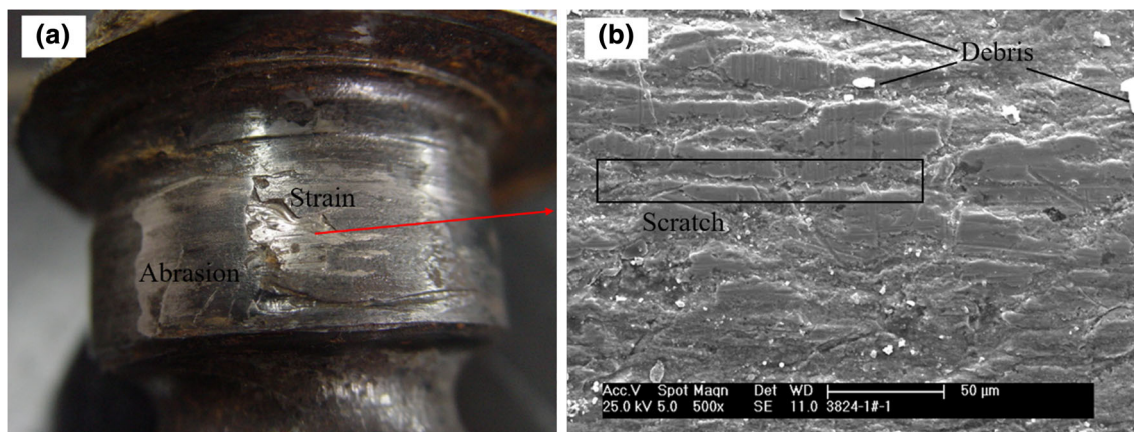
Adhesive wear of the bearing (a) macro-morphology (b) enlarged view
